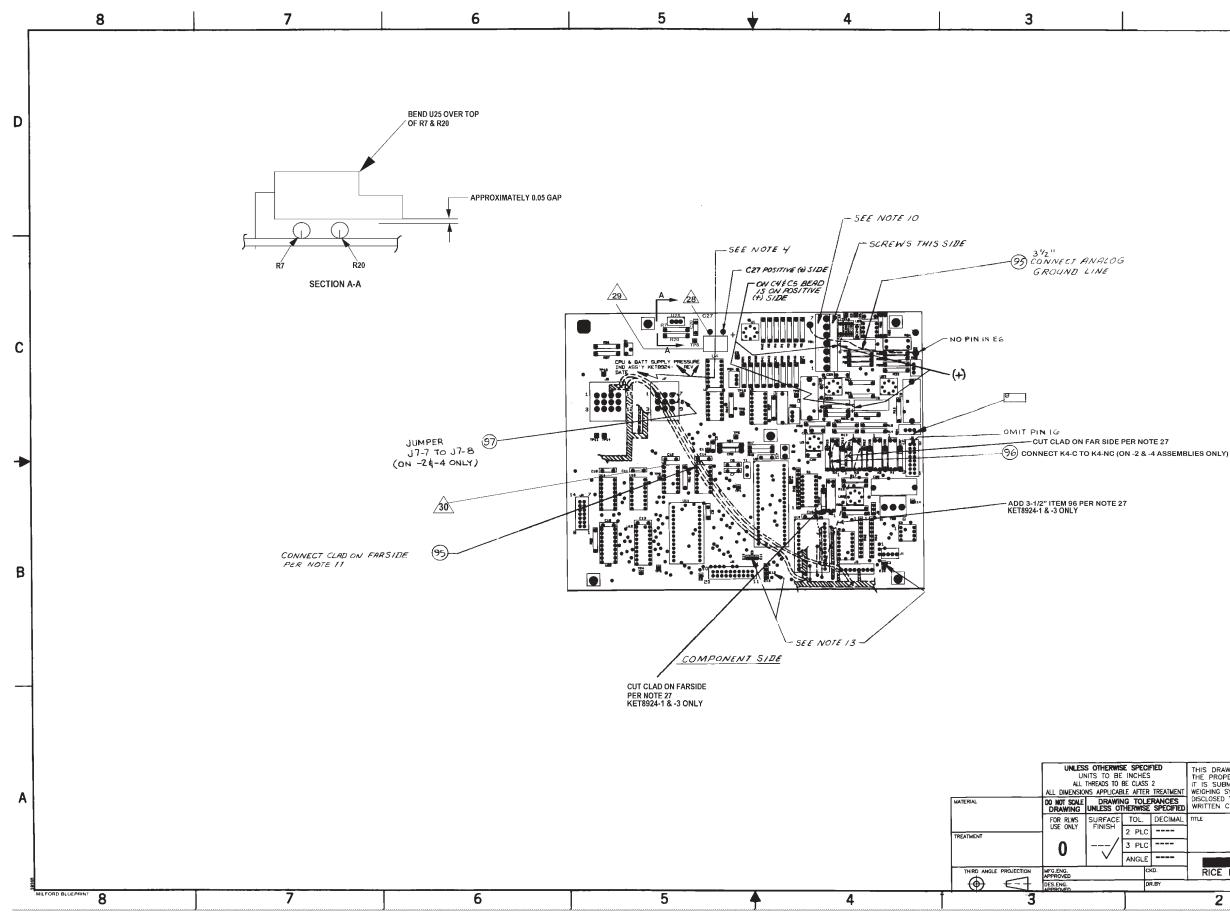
CPU Assembly, sheet 2 (For Battery Units Only)
